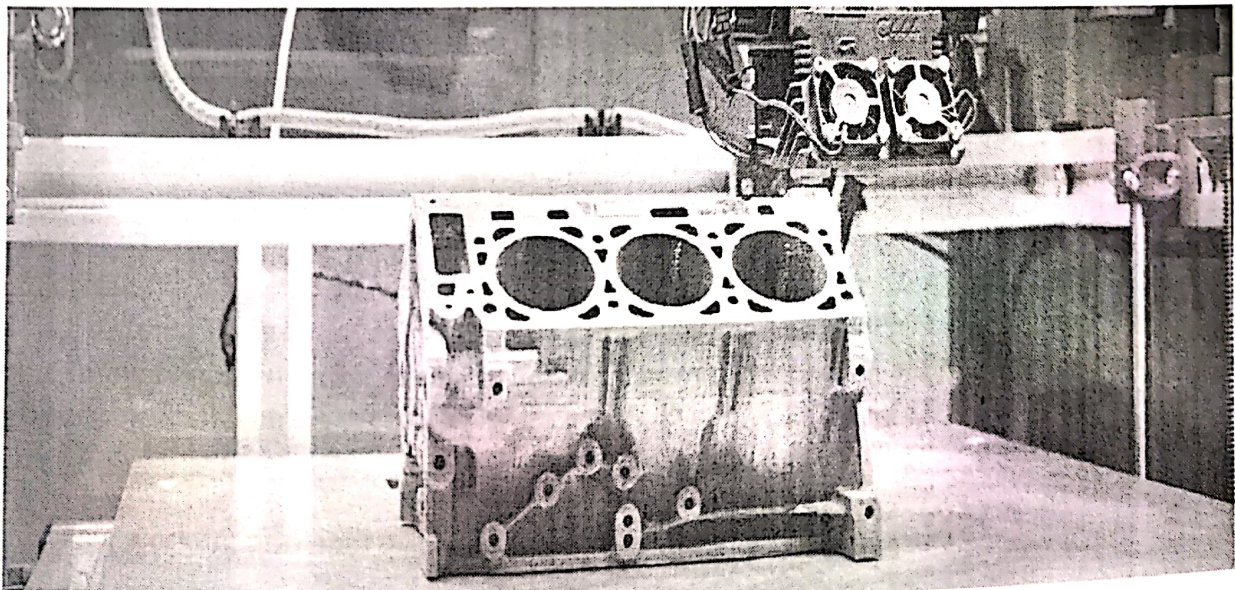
A 3D PRINTED CYLINDER BLOCK
